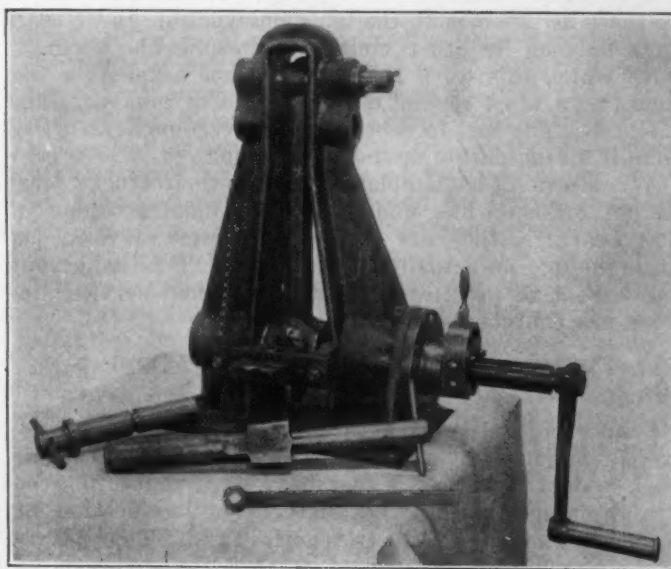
BORING FIXTURE FOR CONNECTING-ROD BEARINGS. When a New Bearing Is Seated in a Connecting-Rod, the Rod Is Mounted in the Fixture by Hanging It from a Wristpin Mandrel. A Tapered Locating-Plug Is Then Pushed into the Fixture in Place of the Boring-Bar To Center the Big-End Bearing, and Clamps on Either Side of the Rod Are Drawn-Up Tight. The Boring-Bar Is Then Inserted and the Cutter Carried by the Bar Is Set To Bore the Bearing 0.001 In. Larger than the Measured Diameter of the Crankpin in Which It Is To Run.
